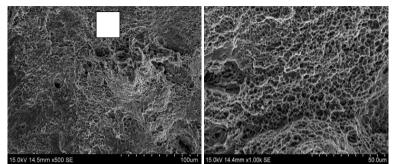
SEM image of tensile fracture sample in 5083 aluminum welded joint
